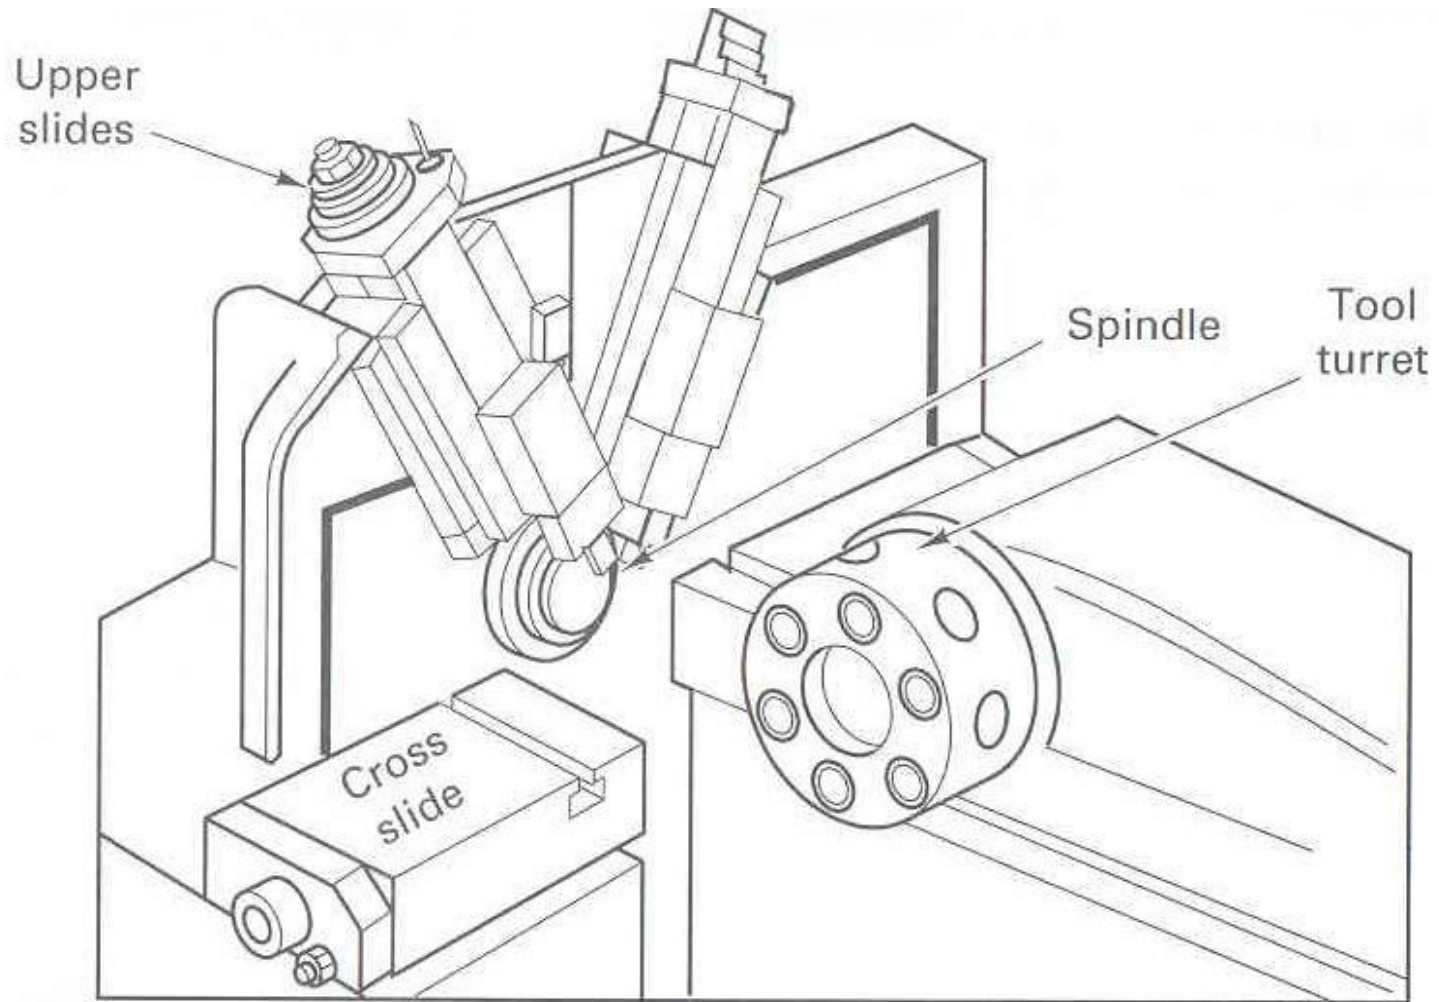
On the turret-type single-spindle automatic, the tools must take turns to make cuts.
